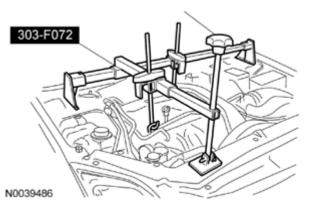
Identifying Engine Support Bar On Front And Rear Engine Lifting Eyes (303-F072) Courtesy of FORD MOTOR CO.
